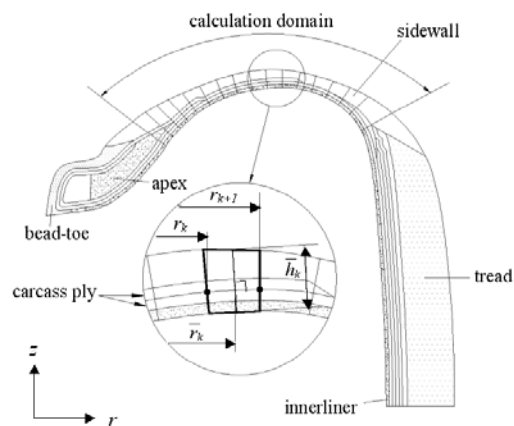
Structure of sidewall and division of the calculation domain in the sidewall.
